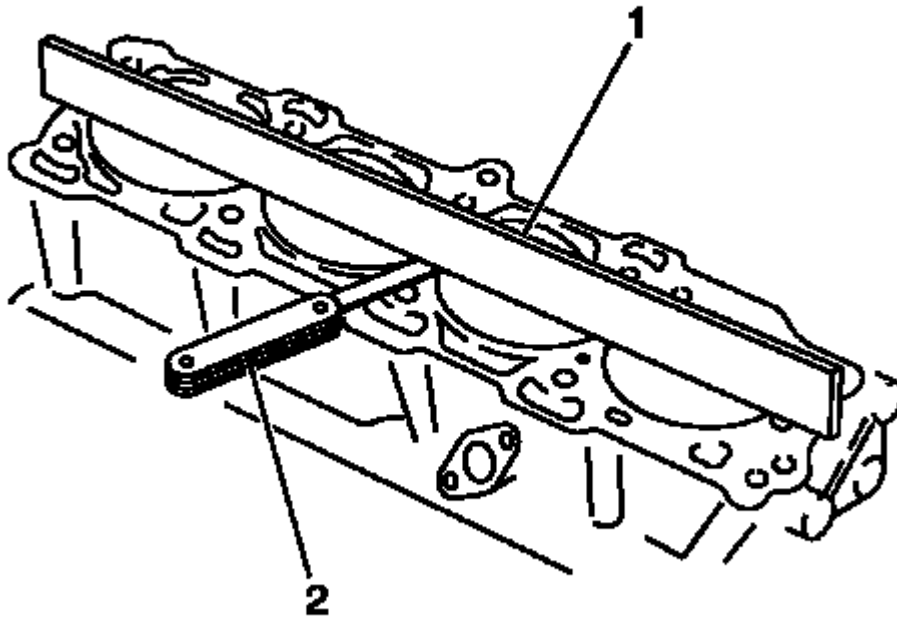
Use A Straight Edge And Feeler Gage To Check Deck Surface For Flatness
